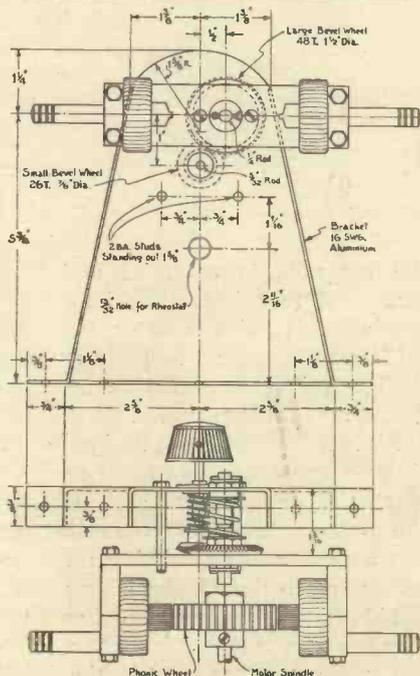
Detailed drawings showing the gear fitted with reduction wheels.
